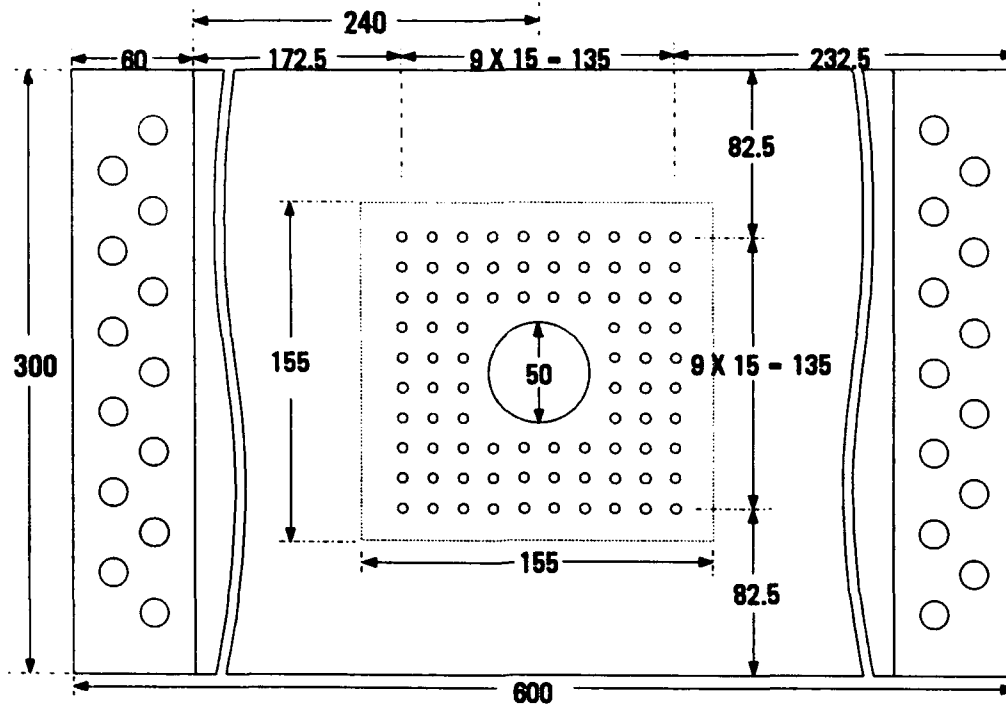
Riveted repair specimen used in this study for finite element analysis and fatigue testing.
